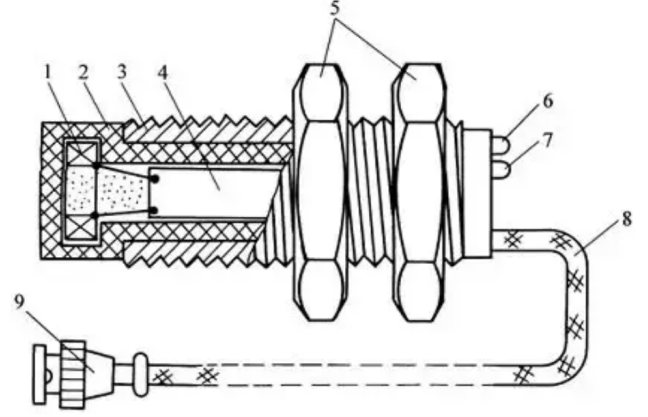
The structure of Eddy Current Sensor: 1 - Eddy coil 2 - Probe housing 3 - Position adjustment thread on housing 4 - PCB 5 - Holding nut 6 - Power indicator 7 - Threshold indicator 8 - Output shielded cable 9 - Cable plug [25].
